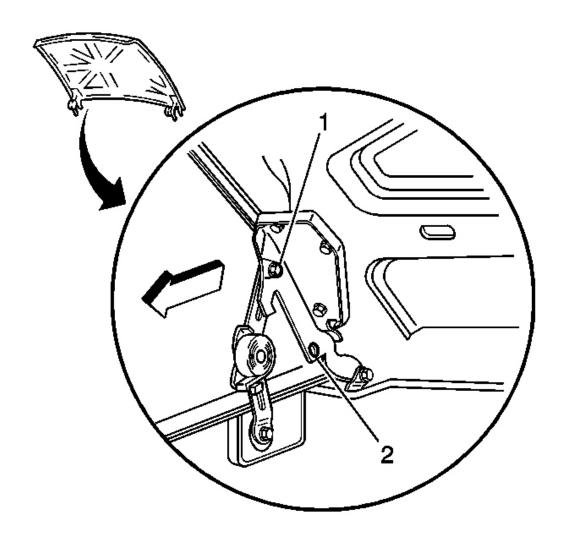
Identifying Hood Hinge Normal And Service Position Bolt Holes Courtesy of GENERAL MOTORS CORP.
